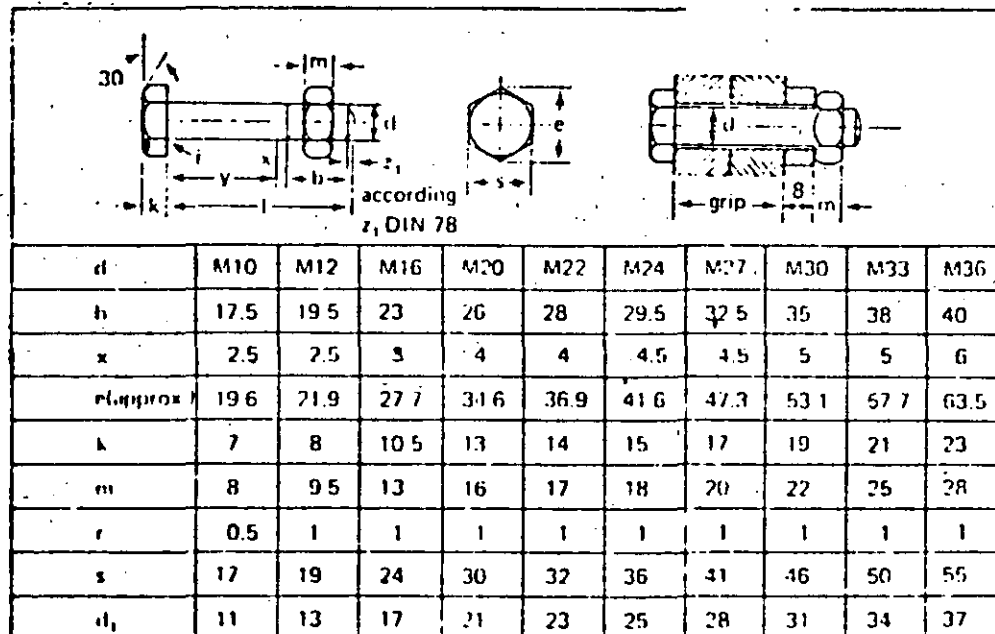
Unfinished Hexagonal Bolts A307, DIN 7980 (Dimensions in mm). (From *Stahlbau*, Deutsches Stahlbau Verband, Cologne, 1957, p. 15).
